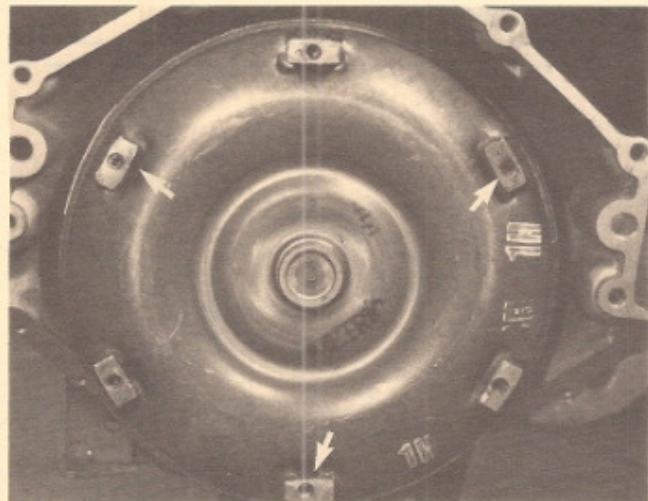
TORQUE CONVERTER — With the dust cover removed, unbolt the six (6) 15mm bolts that secure the torque converter to the flywheel. (See figure 100.)
